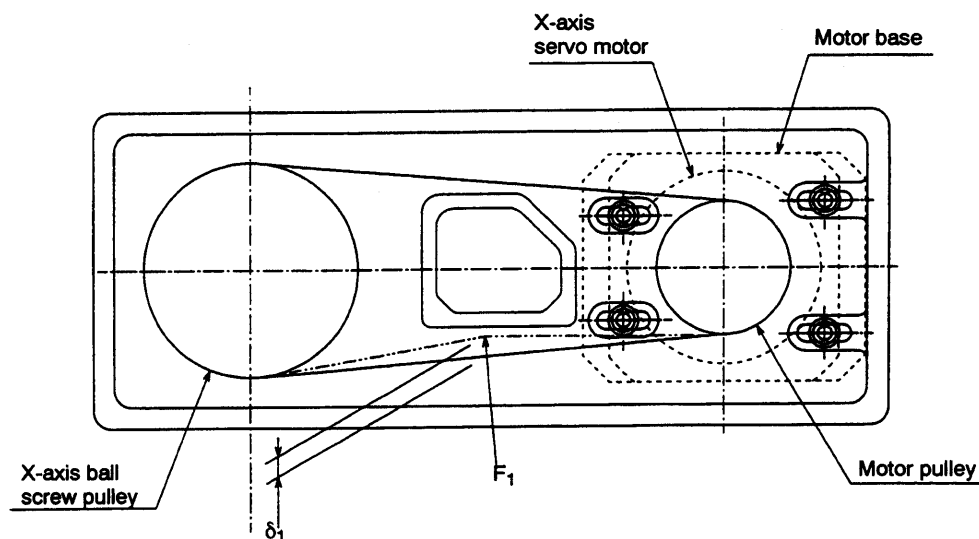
Timing Belt for Lower X-axis Servo Motor
